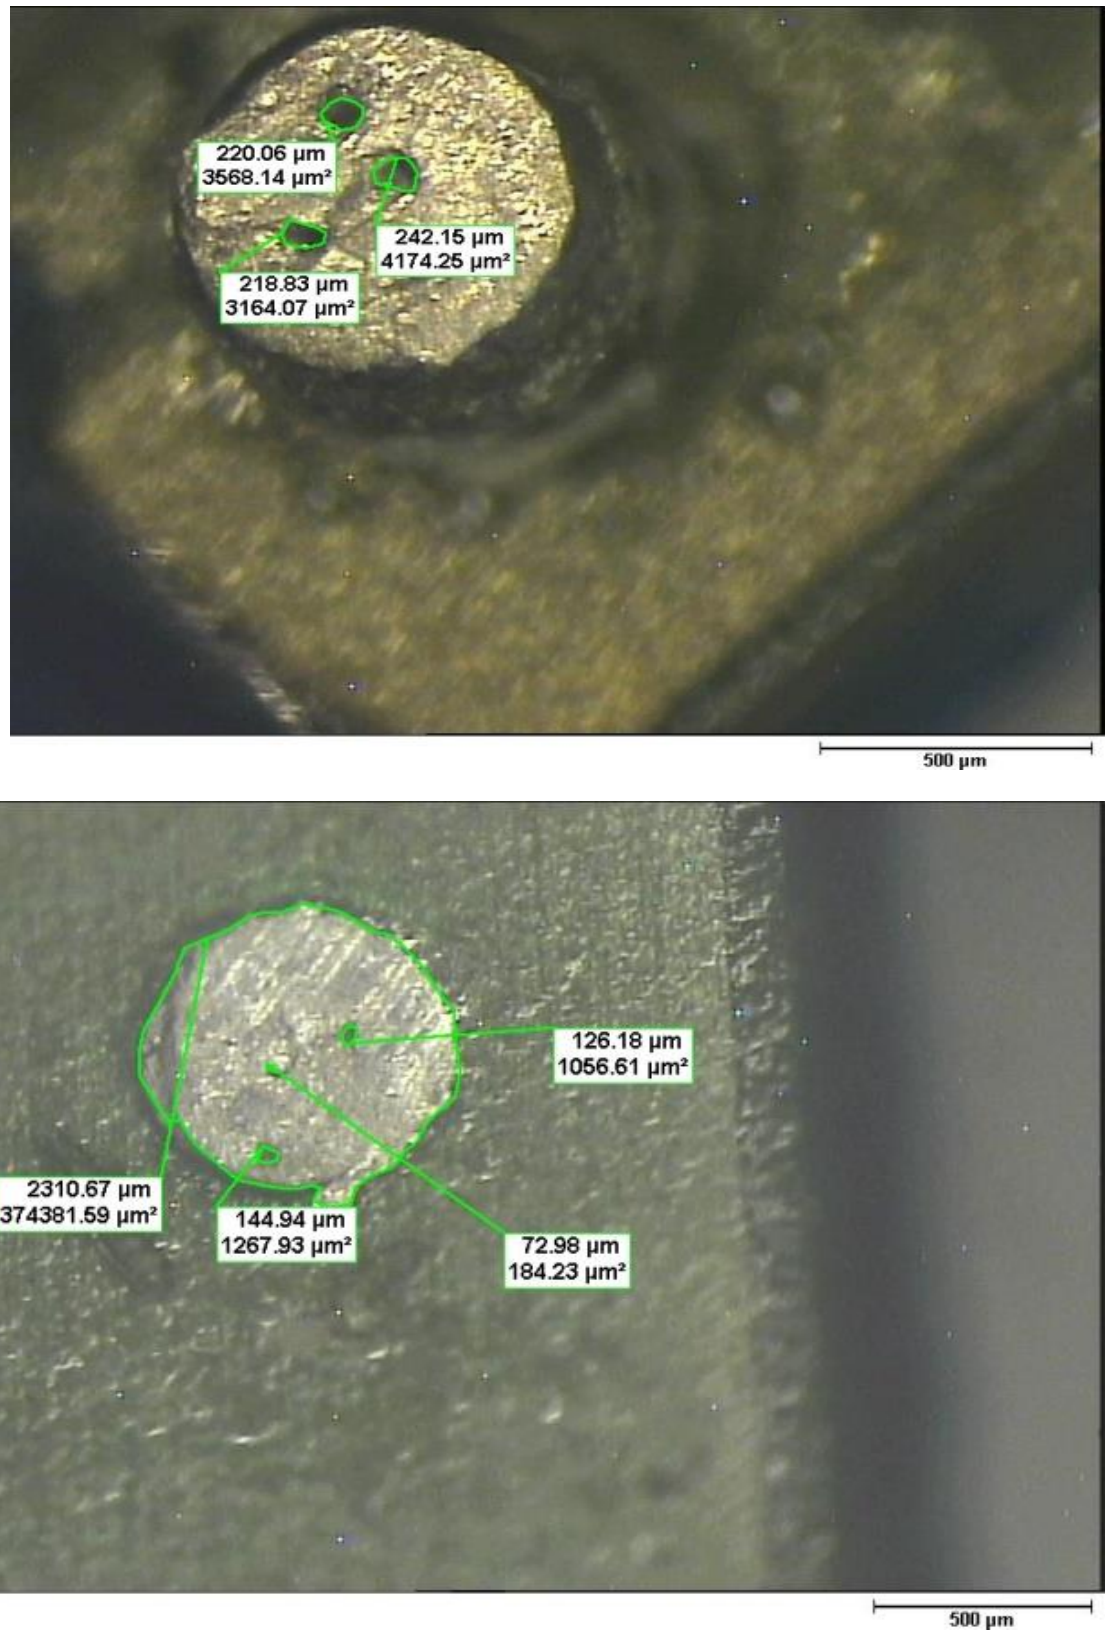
Voids observed on fracture surfaces after fatigue testing
